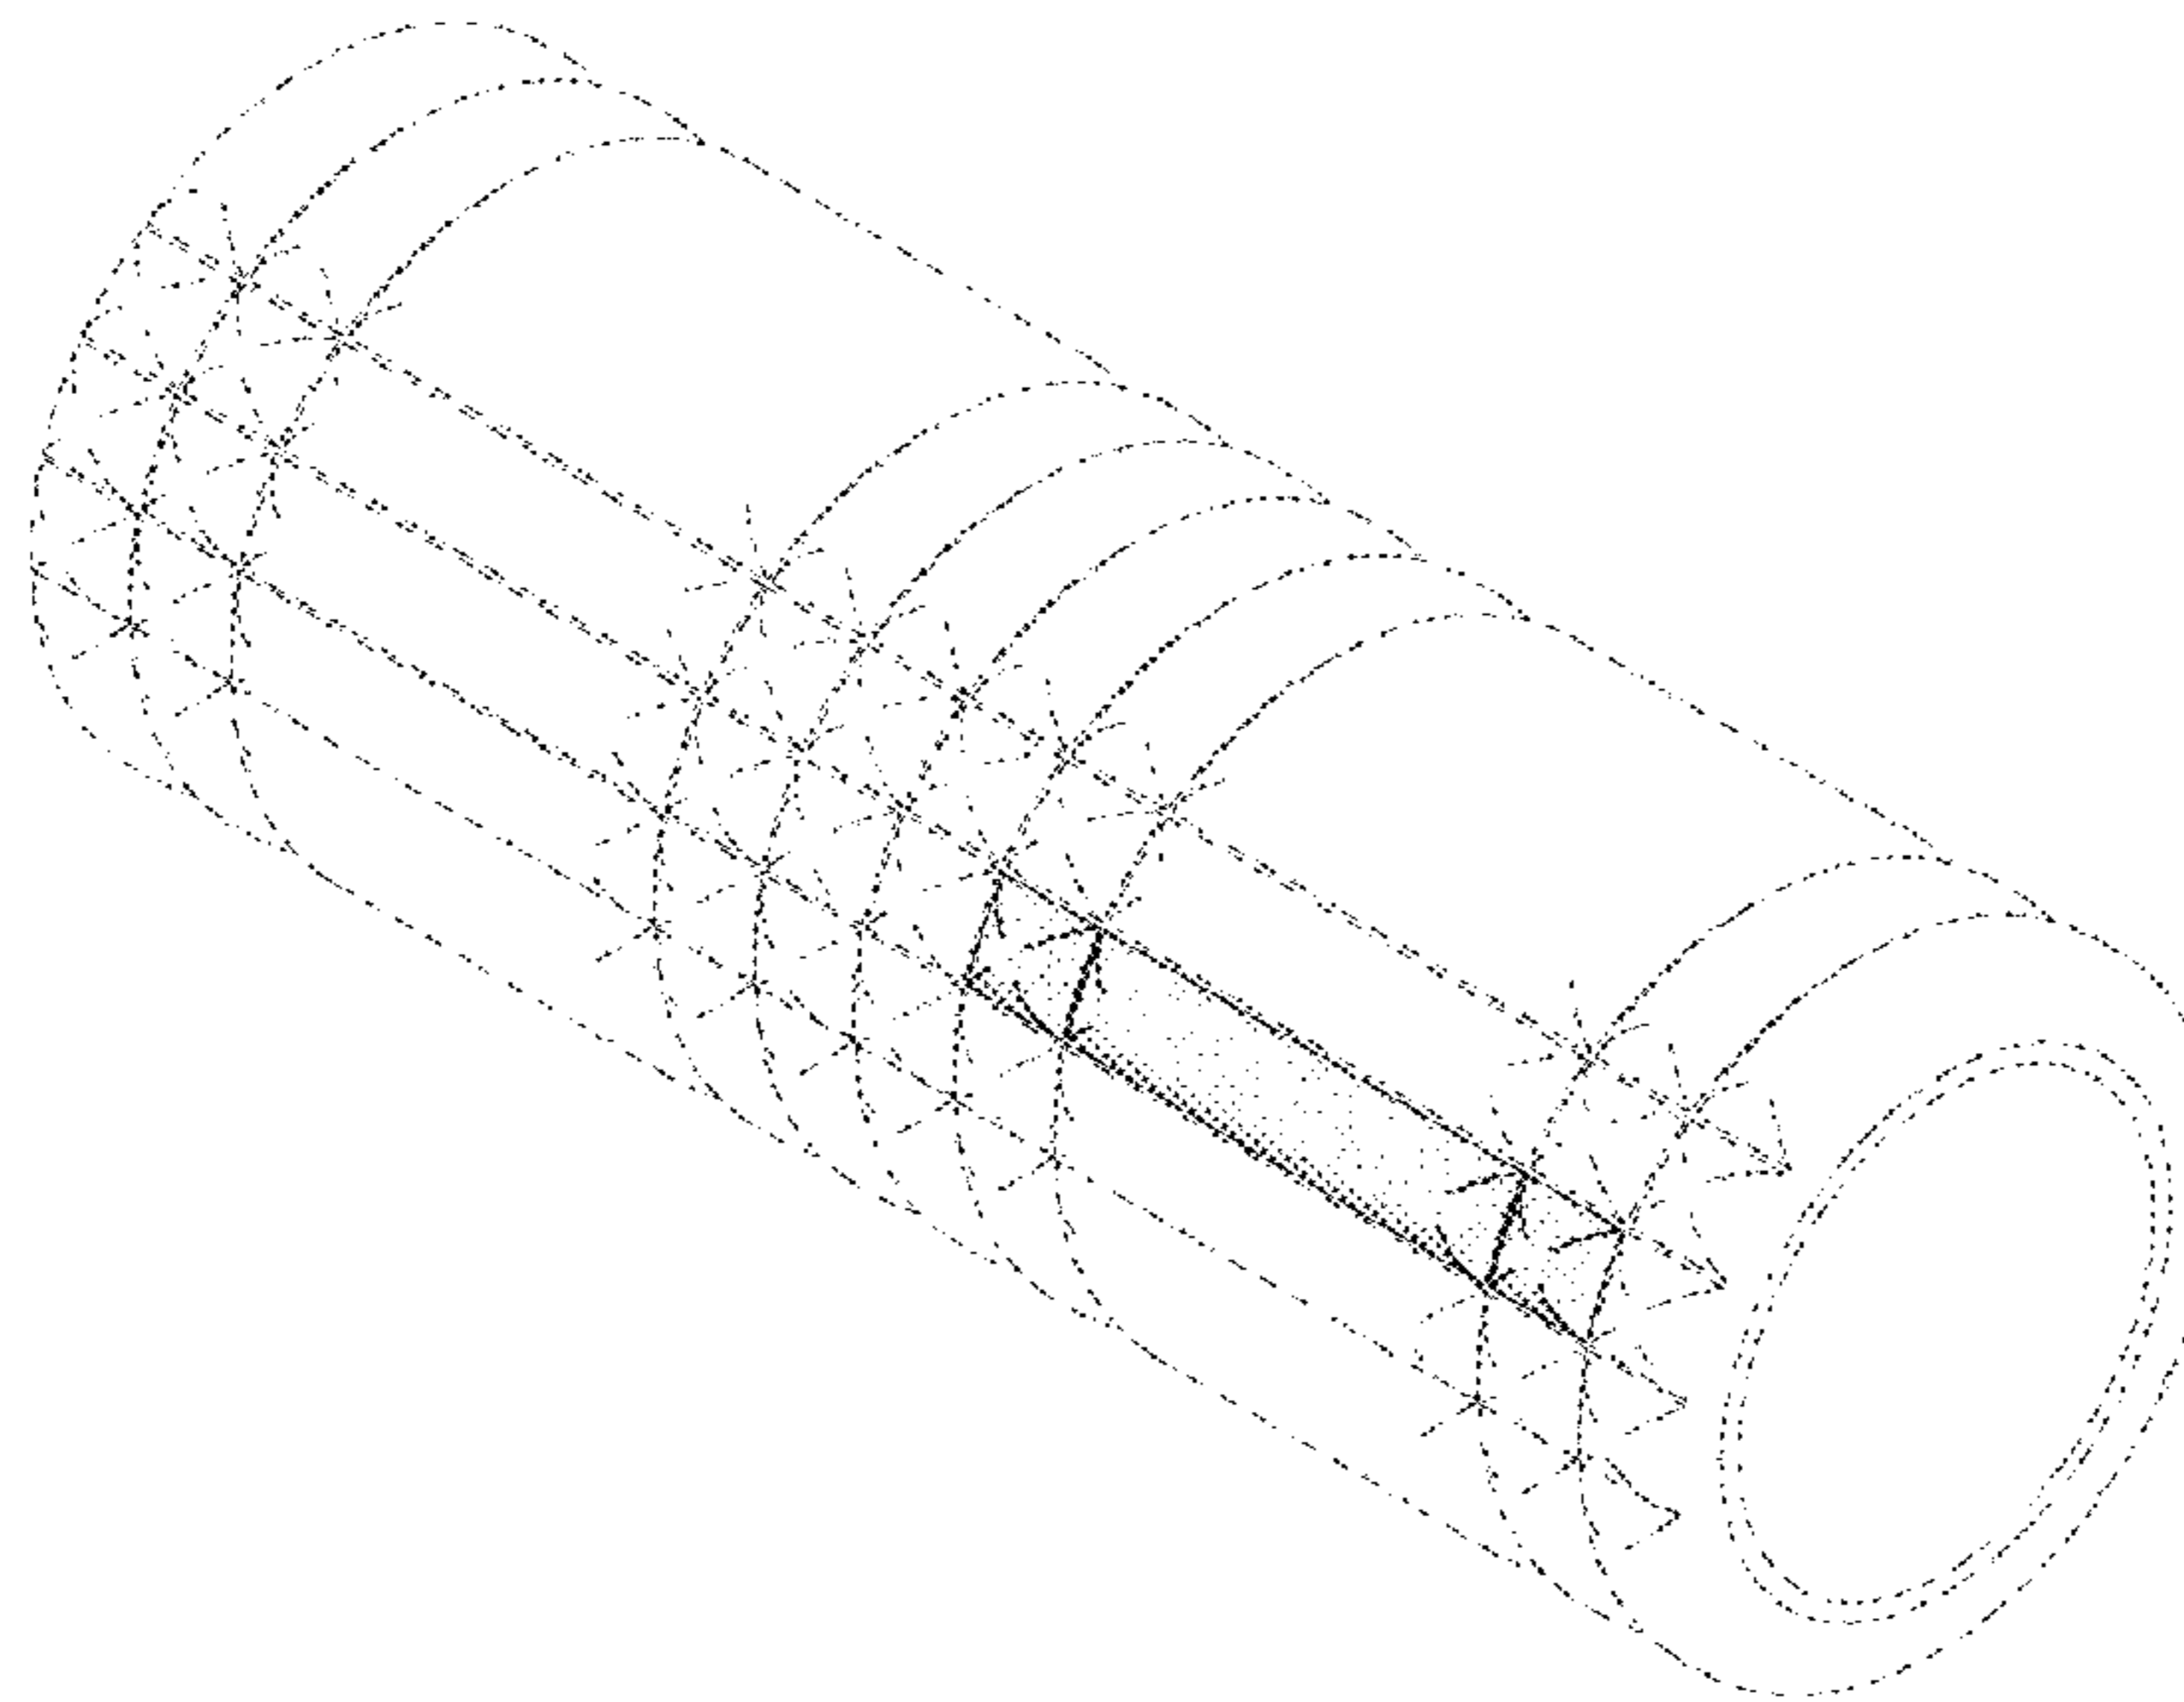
is a perspective view of a massage roller showing a first embodiment of my new design.
